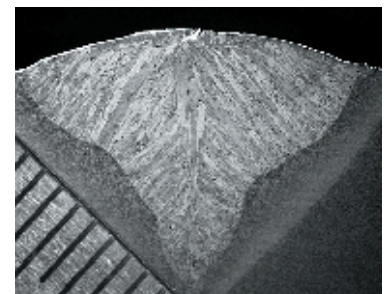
Butt weld with 80% penetration (12 mm plate thickness with no joint preparation). Travel speed 80 cm/min
